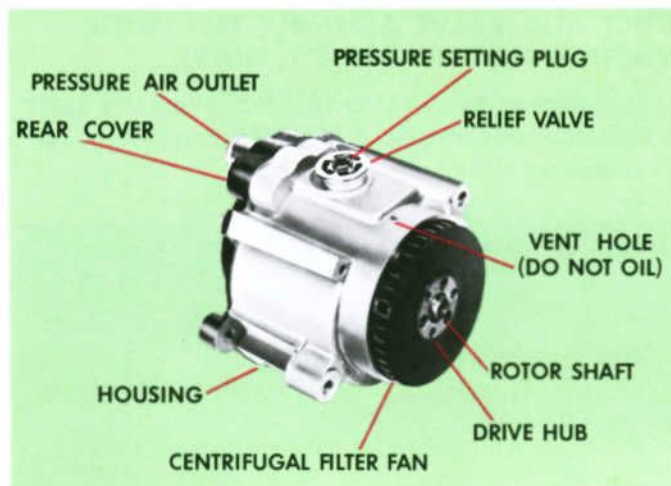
AIR SUPPLY PUMP (THERMACTOR SHOWN)
